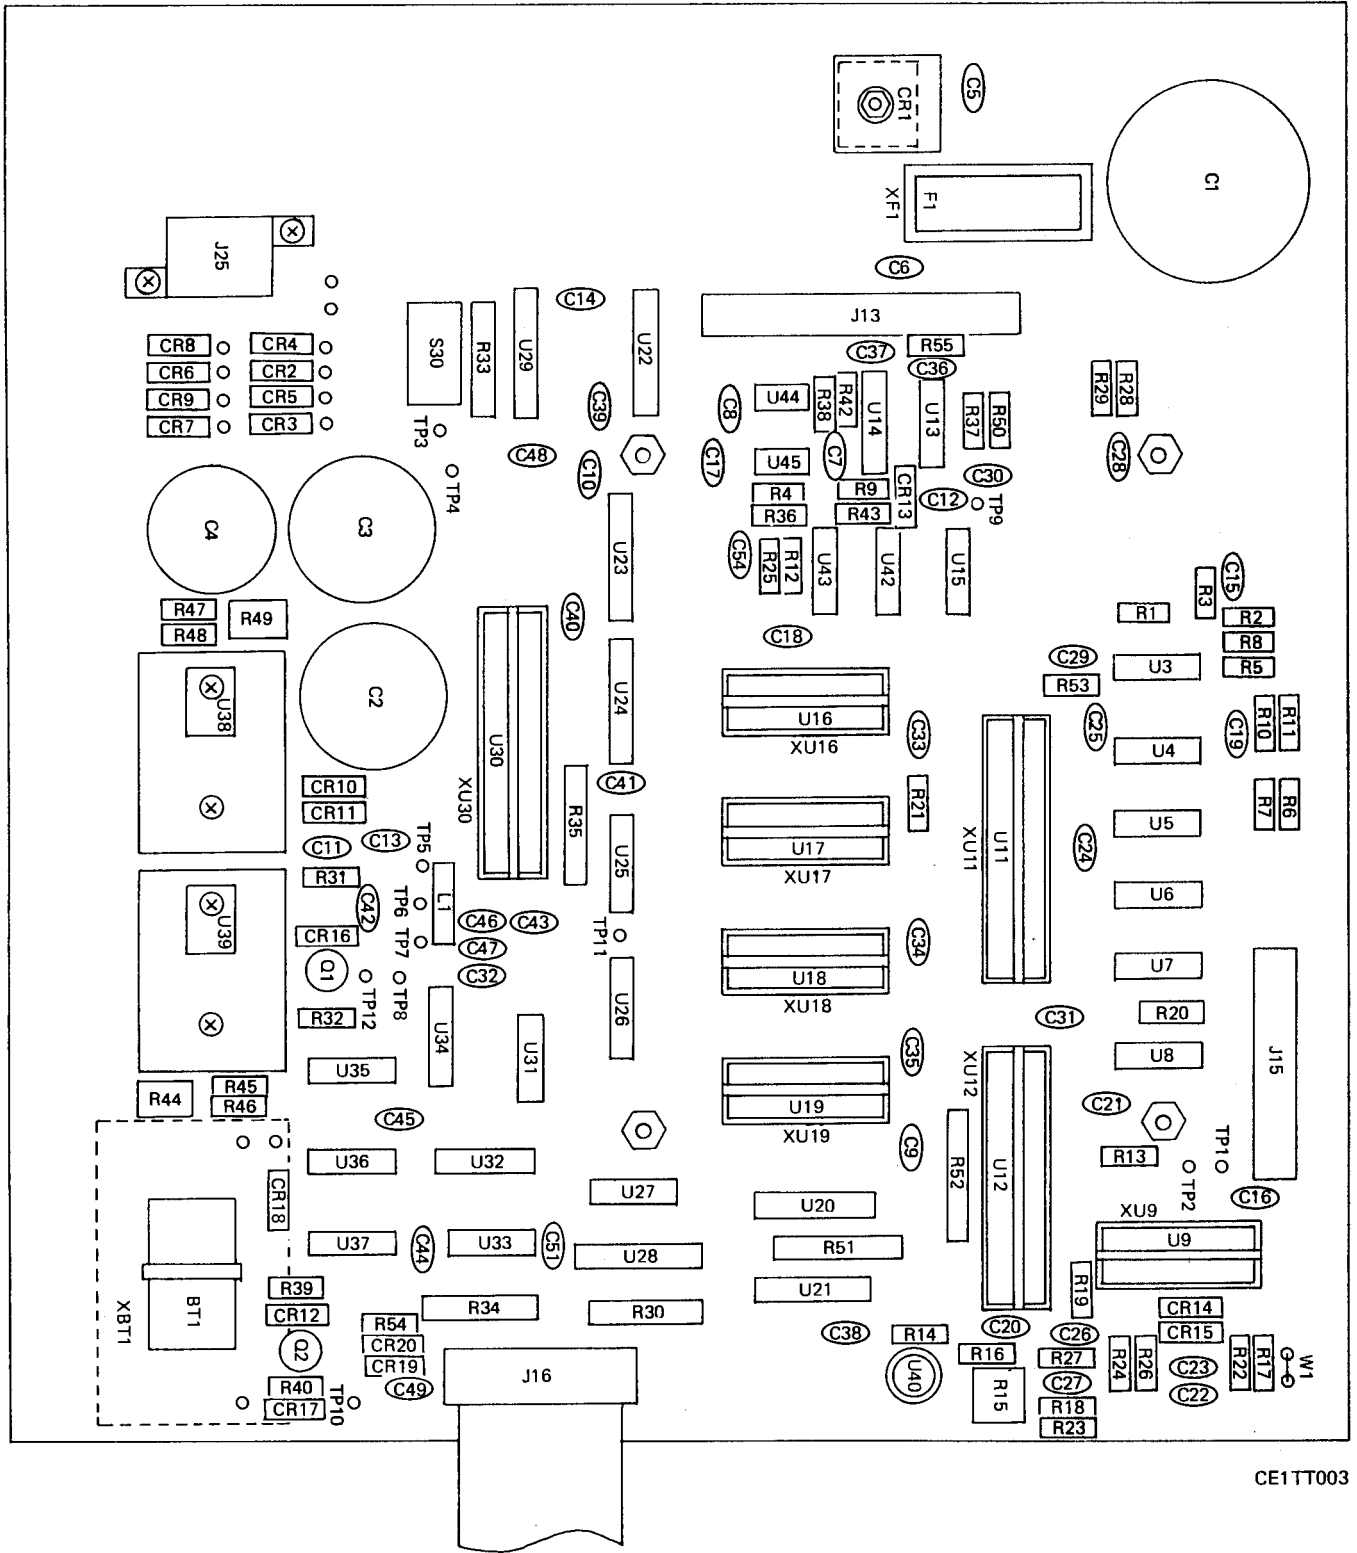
PCB Assy Processor (Sheet 3 of 6)
